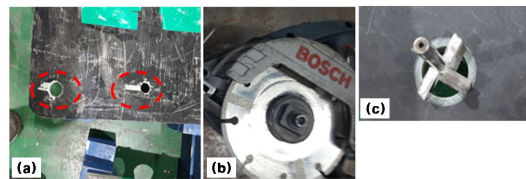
Delamination of the gel coat by tools: (a) Delamination of gel coat, (b) Straight cutting tools, (c) Hole cutting tools.
